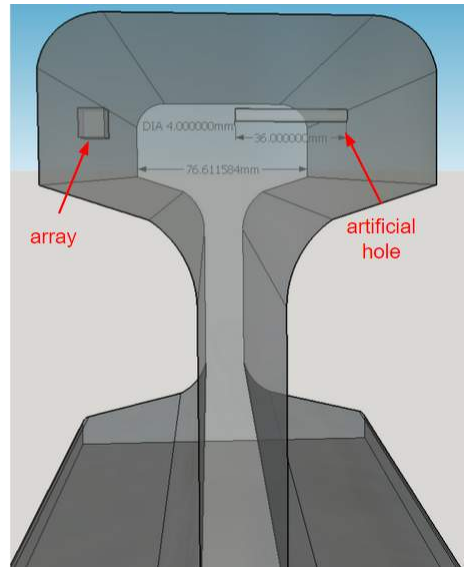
Side drilled hole (4mm in diameter and 36mm in length) located in the head of the rail.
